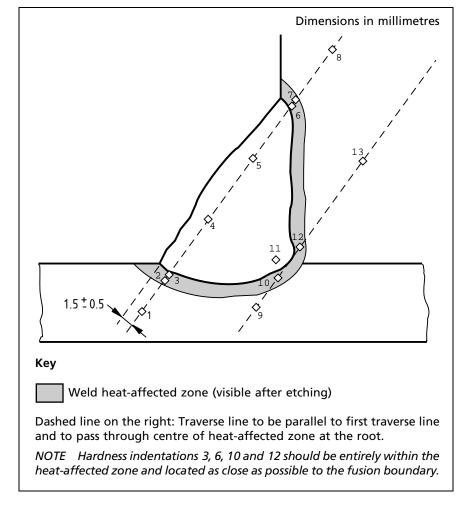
Recommended locations for hardness indentations on a fillet weld
